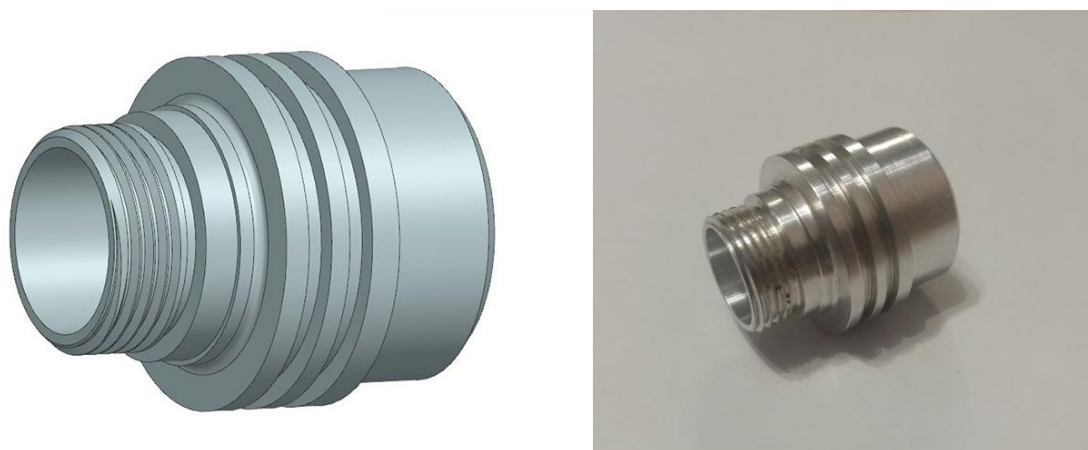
General view of the 3-D model and photo of the threaded bushing
